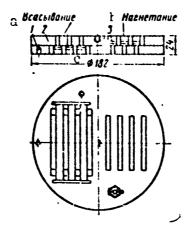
Valve of second stage: 1) lower board; 2) upper board; 3) plate. a) Intake; b) delivery; c) diameter.
